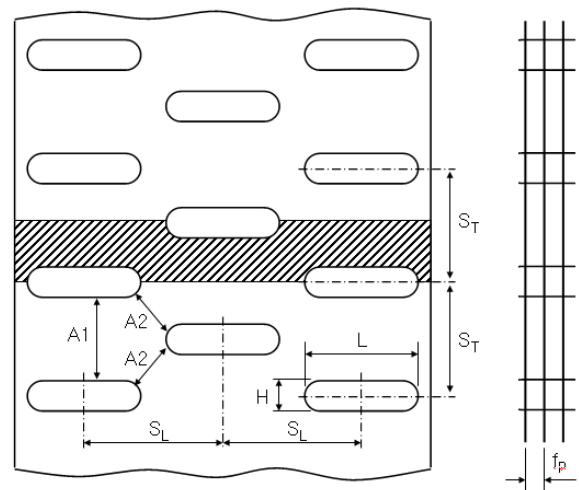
Schematic drawing of the heat exchanger with flat tubes and plate fins
